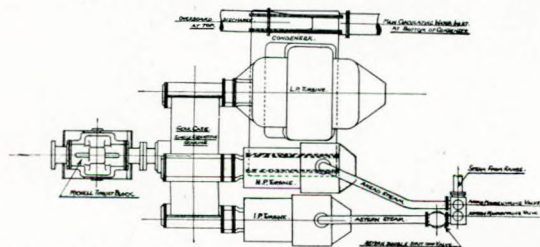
General arrangement of single-reduction geared turbine installation.
